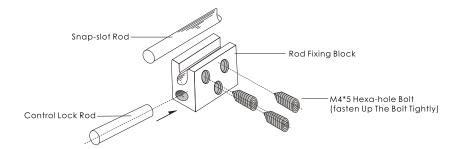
ASSEMBLING OF DOOR-LOCK CONTROL ROD
